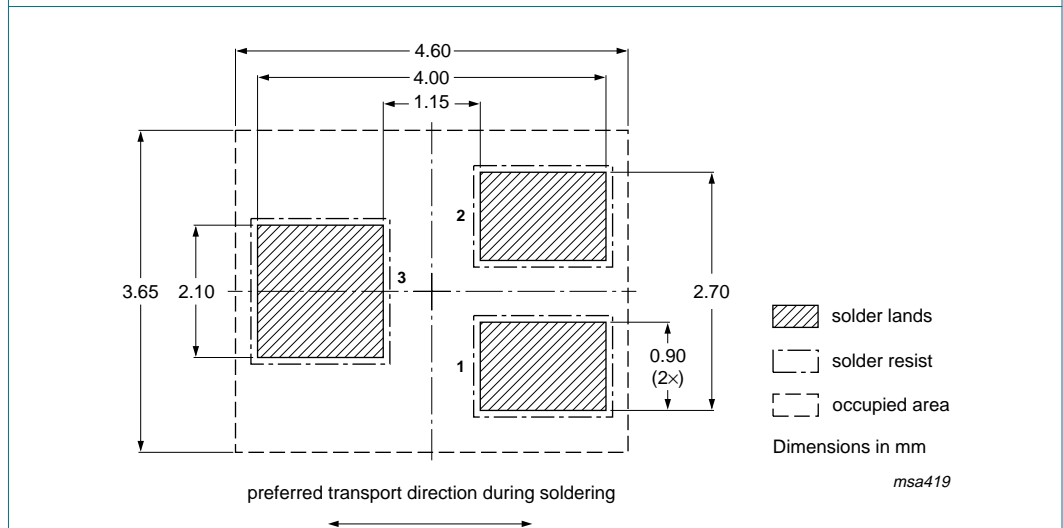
Wave soldering footprint BAW56W (SOT323/SC-70)
